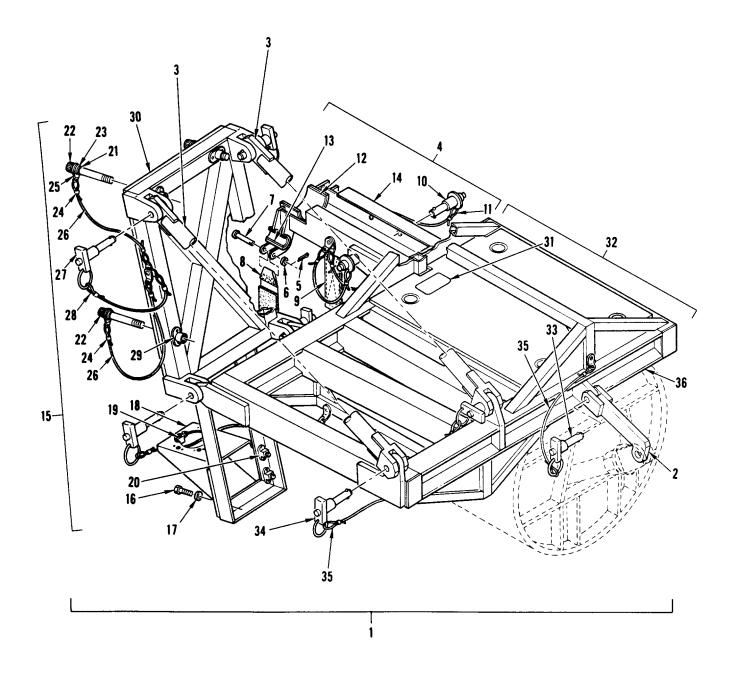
GROUP 80 SPECIAL TOOLS TAIL WHEEL STEERING BAR/WINCHING YOKE
